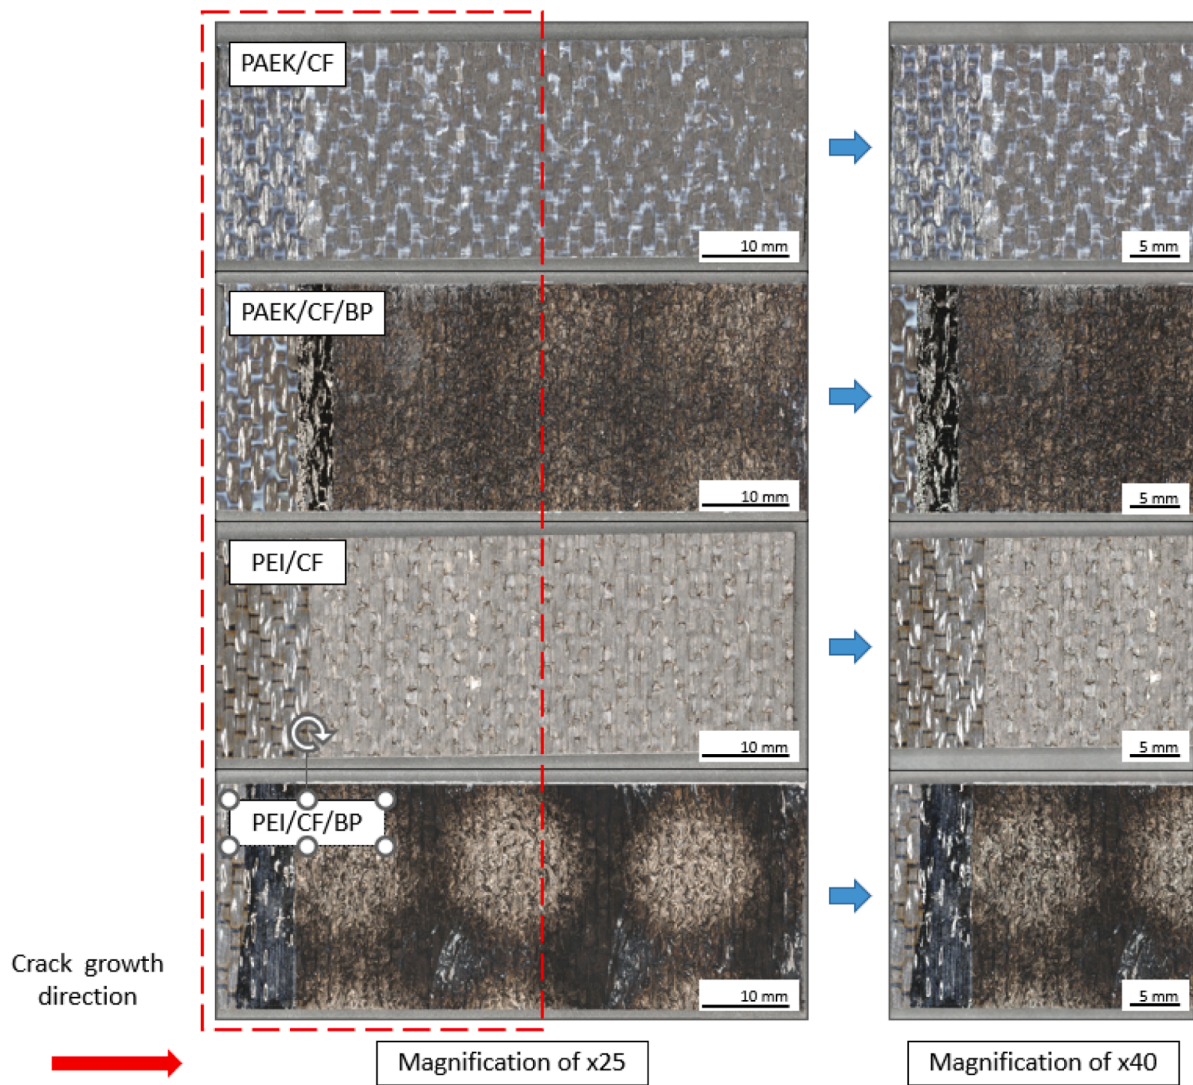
Optical microscopy images of the mode-I fracture surfaces for all samples.
